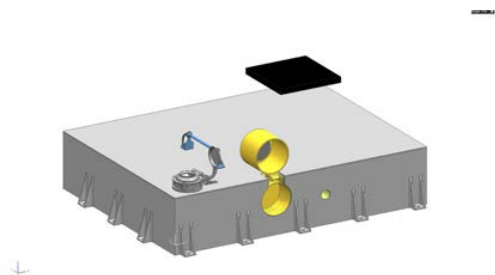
L-VRAP CAD model showing enclosure. Enclosure dimensions 460 mm × 350 mm, ht 97 mm
